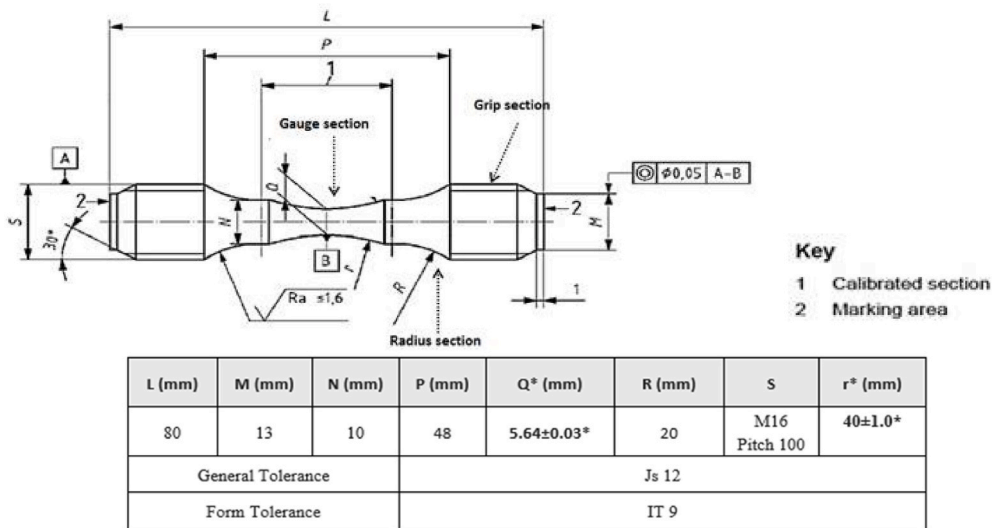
EBM Ti-6Al-4V cylindrical fatigue specimen drawing in line with BS EN6071:2010 [19].
